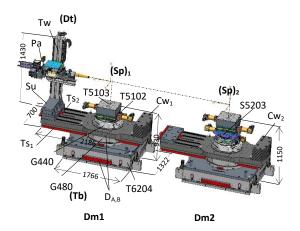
CrQ-Dm Layout 3D view design (CAD)
